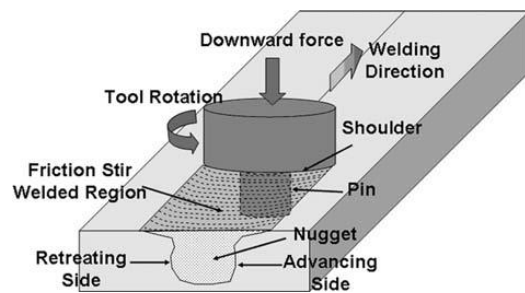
Illustration of Friction Stir Welding technique.[2]
